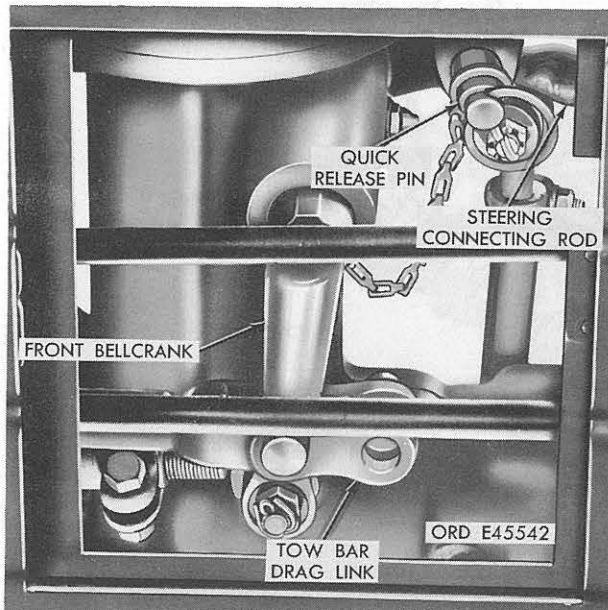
Steering access opening lid removed showing two-wheel steering connected.
